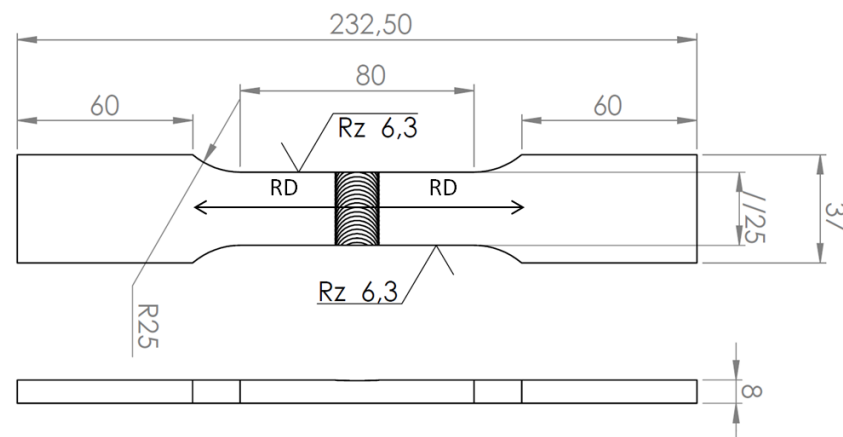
Geometric drawing of the specimen for FSW and DS-FSW tensile test.
